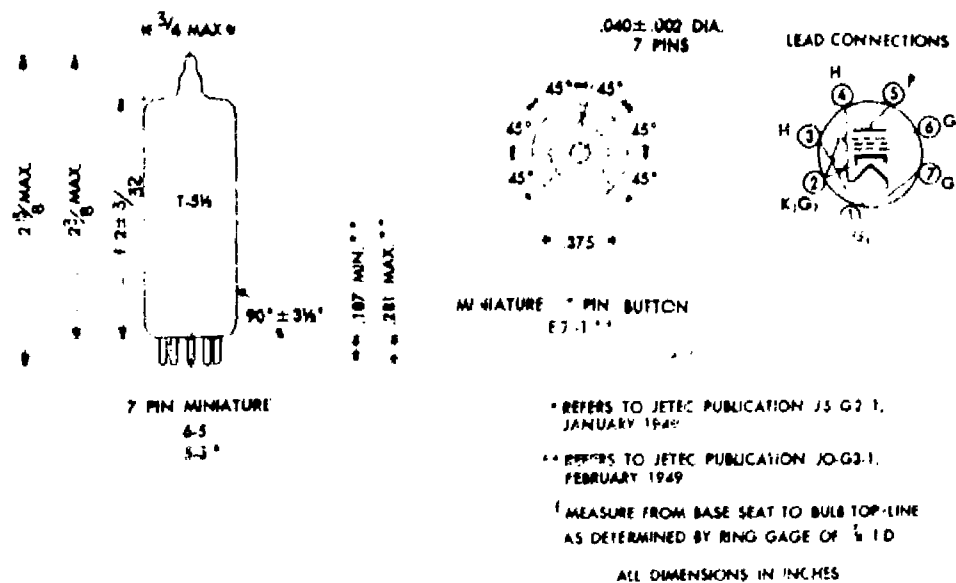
Outline Drawing and Base Diagram of Tube Type JAN-6005/6AQ5W
